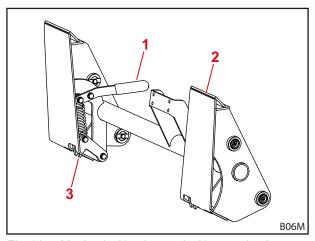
Mechanical implement locking mechanism on skid-steer change frames
